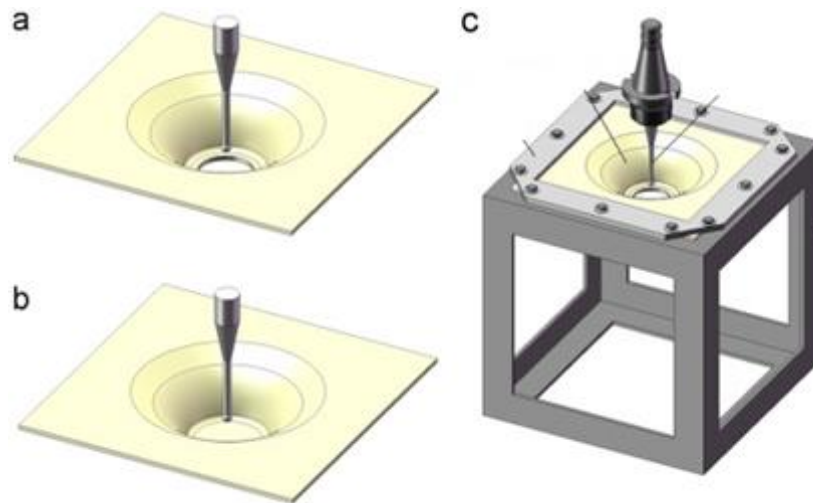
ISF of sheet metal blanks; (a) pre-cut concentric hole, (b) conventional (c) Schematic representation of the experimental setup [13]
